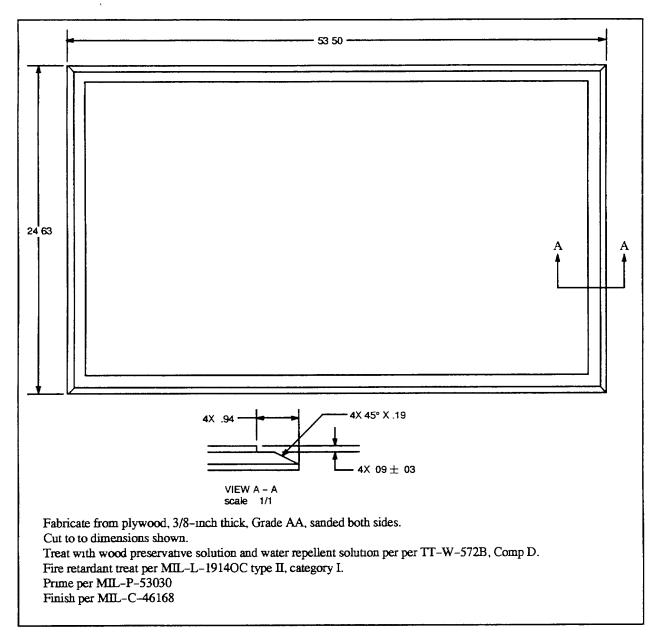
Cover Assembly Pressure Reducing, Panel Top
